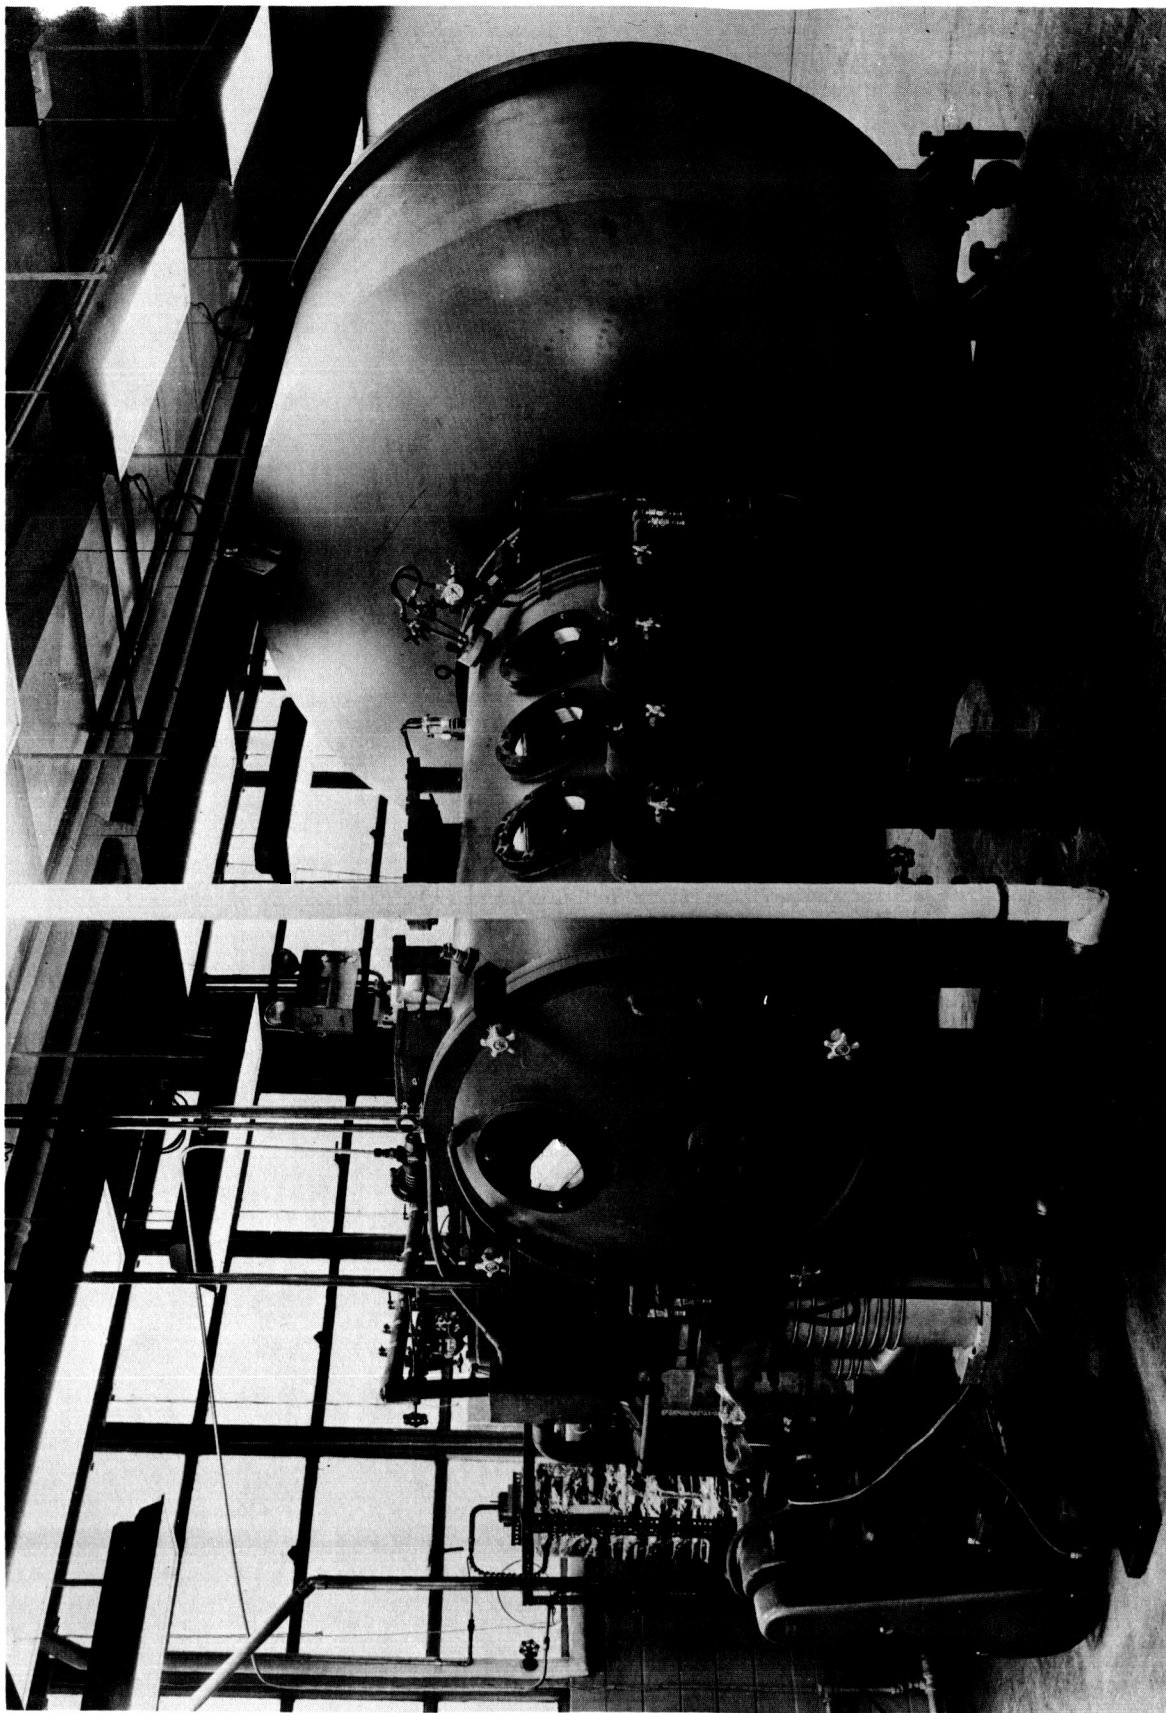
Vacuum-Purge, Controlled Atmosphere Welding Chamber, 3 Feet in Diameter x 6 Feet Long, Equipped with a 10-Inch Diameter Oil Diffusion Pump Capable of Attaining a Pumping Speed of 4100 l/sec at a Pressure of 1×10^{-5} Torr. An Extension to the Chamber, 8 Feet in Diameter x 6 Feet Long, is Shown in Place. (C63120631)
